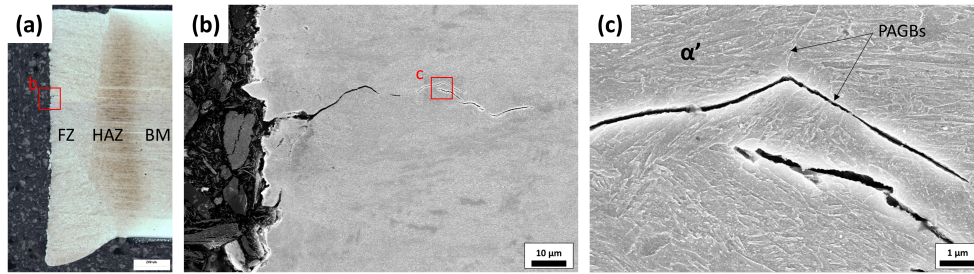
Cross section of fractured laser welded MMn tensile test specimen showing the (a) overall view, (b) secondary crack, (c) magnified view of the inset region in (b)
